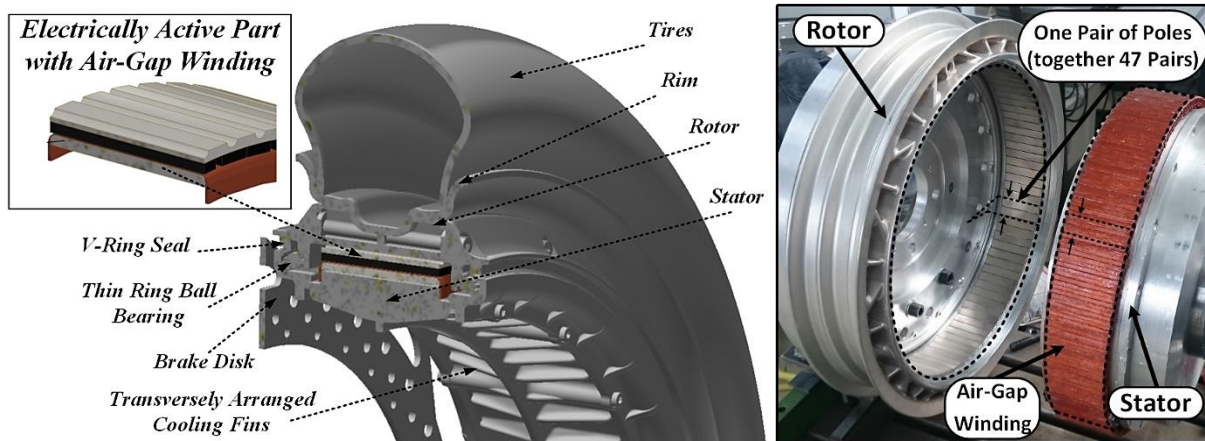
Wheel Hub Motor for a Hub-Less Scooter of OvGU left: CAD Model, right: Prototype [4]
